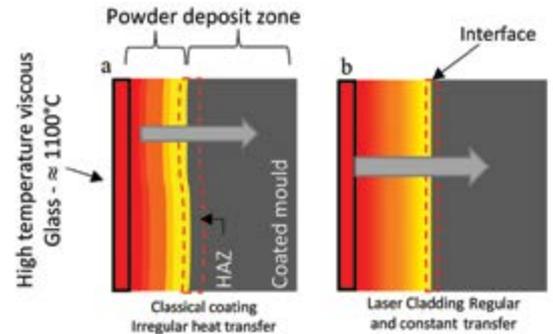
Drawing of the mould thermal behaviour due to the viscous glass pouring⁽¹⁾.
